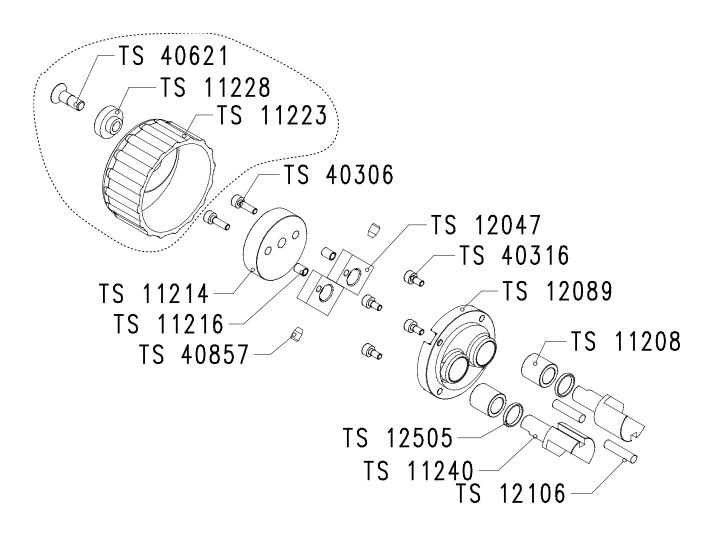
tape cleaner assembly TS 10206, details (the items TS 40621, TS 11228, TS 11223 are not included in the TS 10206 assembly; they shall be ordered separately)
